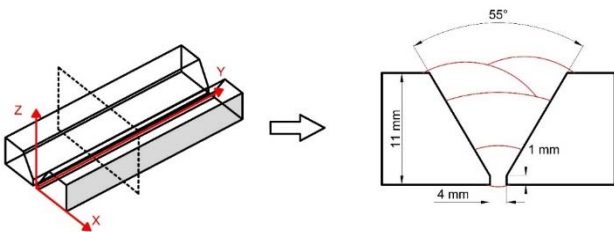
Schematic drawing of edge preparation and welding configuration.
